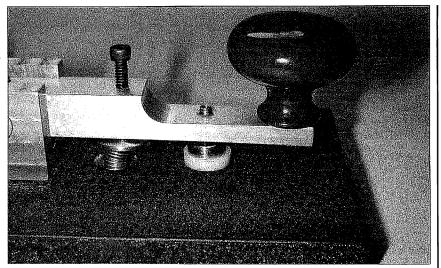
Photo I. The knob is a drawer pull. The upper contact is a cone-pointed set screw.
